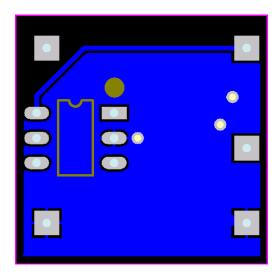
Bottom, TDFN4 1.2 mm x 1.6 mm PCB Layout
